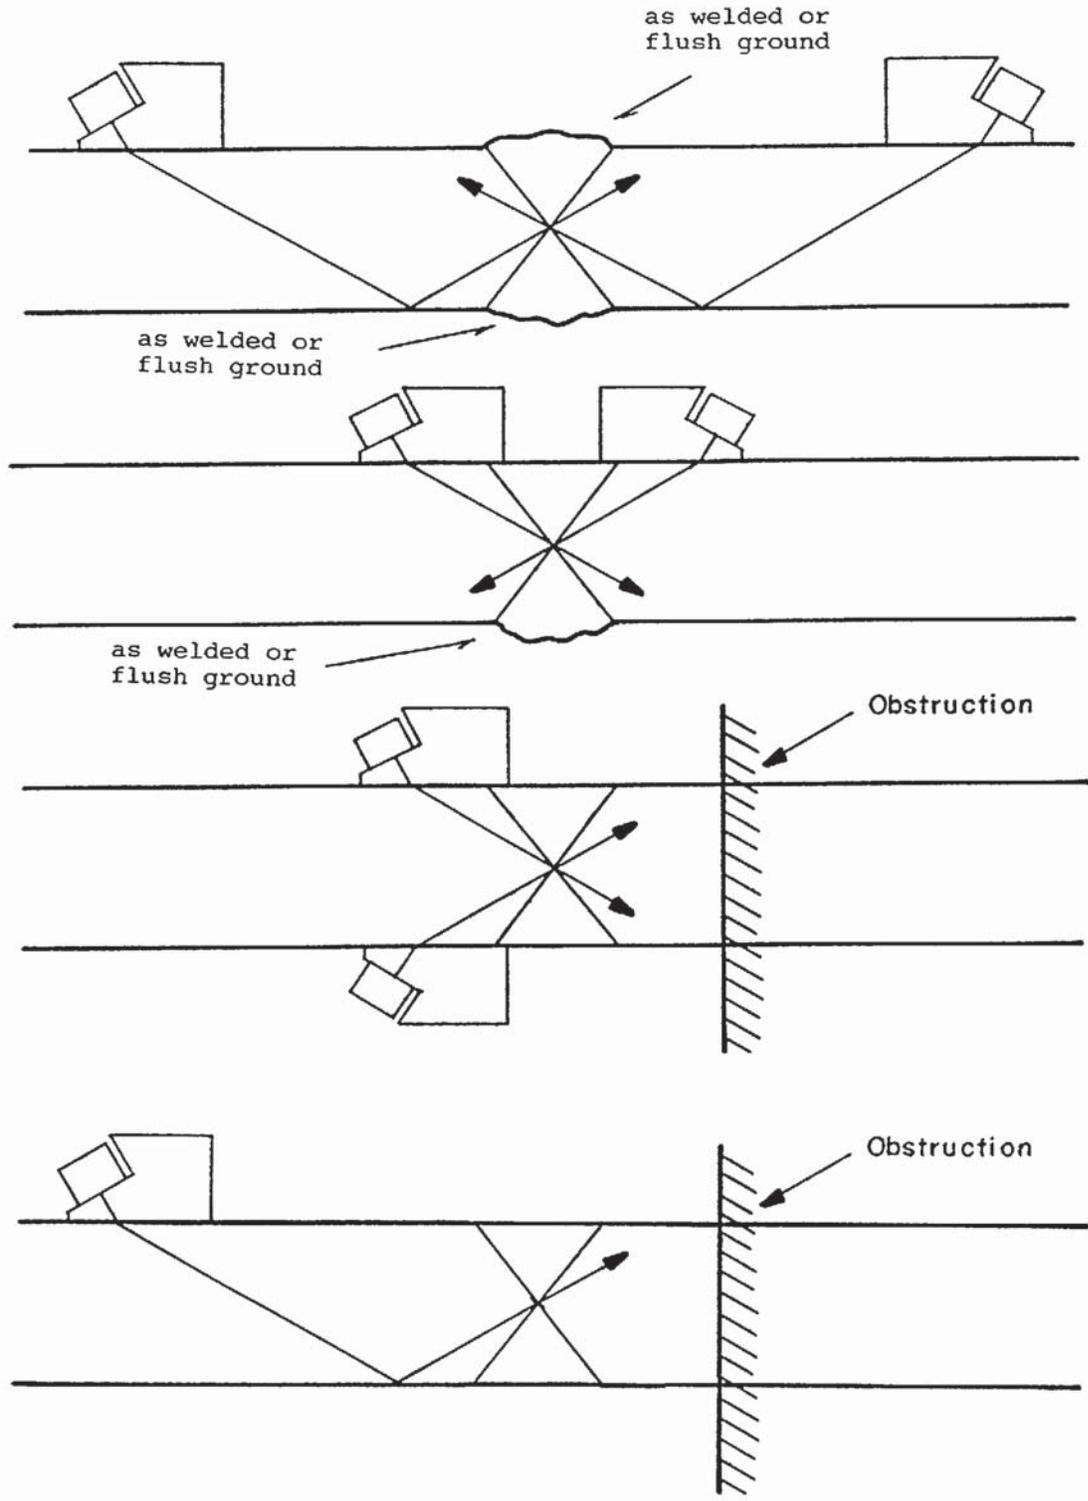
Example Full Coverage Scanning Techniques for Butt Welds.
